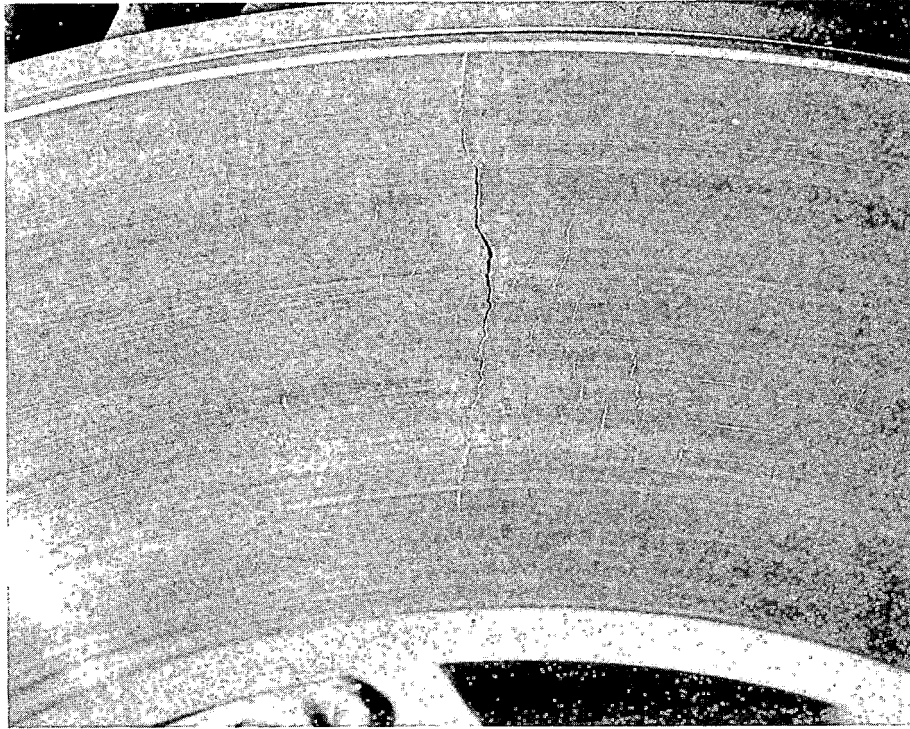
L-2 DISC BRAKE ROTOR; LARGE RADIAL CRACK.
